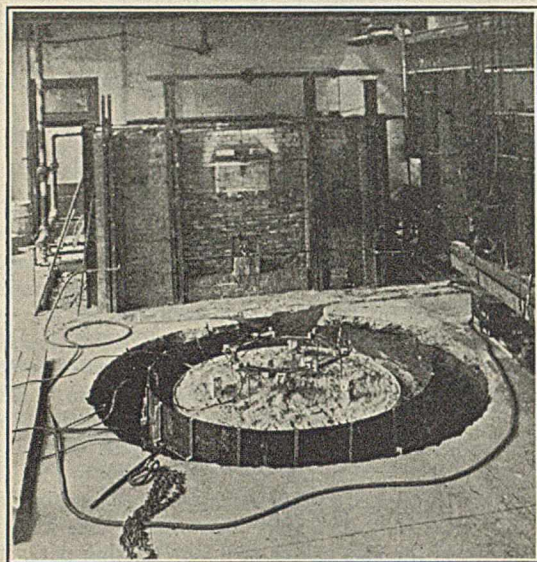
Melting Furnace (Back), Assembled Mold and Annealing Furnace (Center), and Trough (Right)
